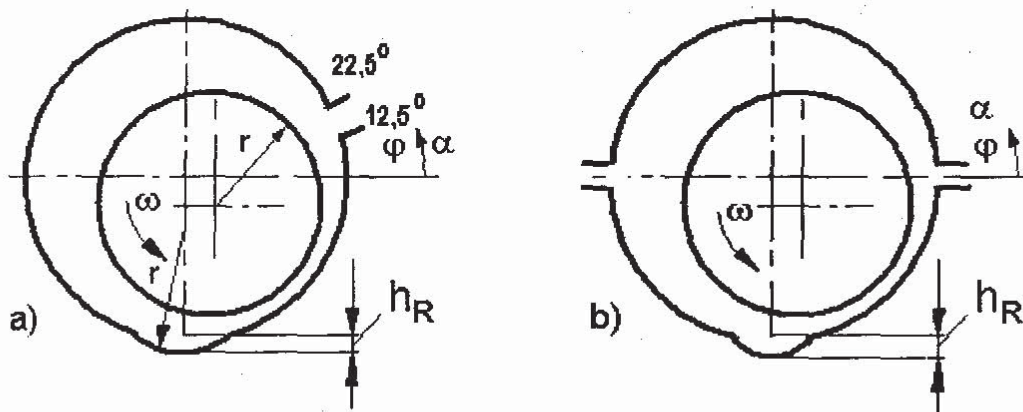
Bearings considered in the paper: a – cylindrical, b – 2 –pockets;  $h_R$  – depth of recess
